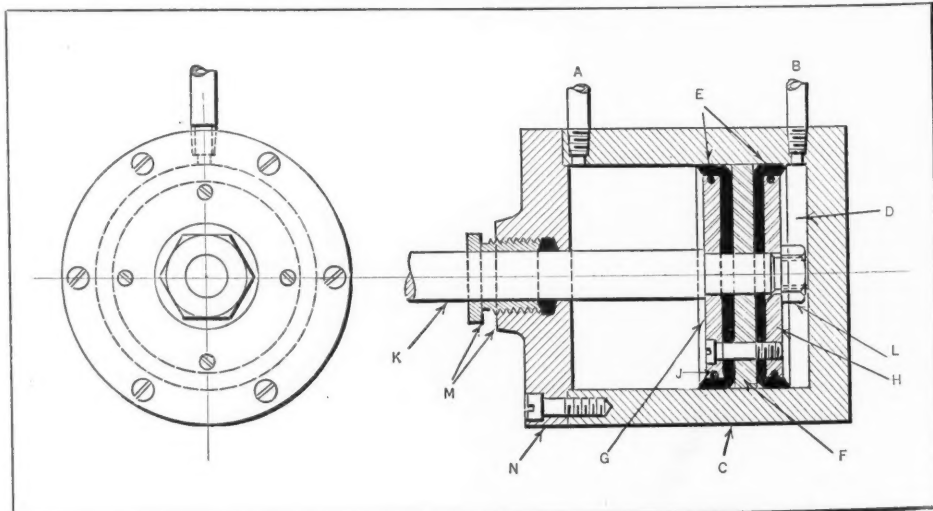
Construction of Air Cylinder of the Type Commonly Used for Operating Fixtures
